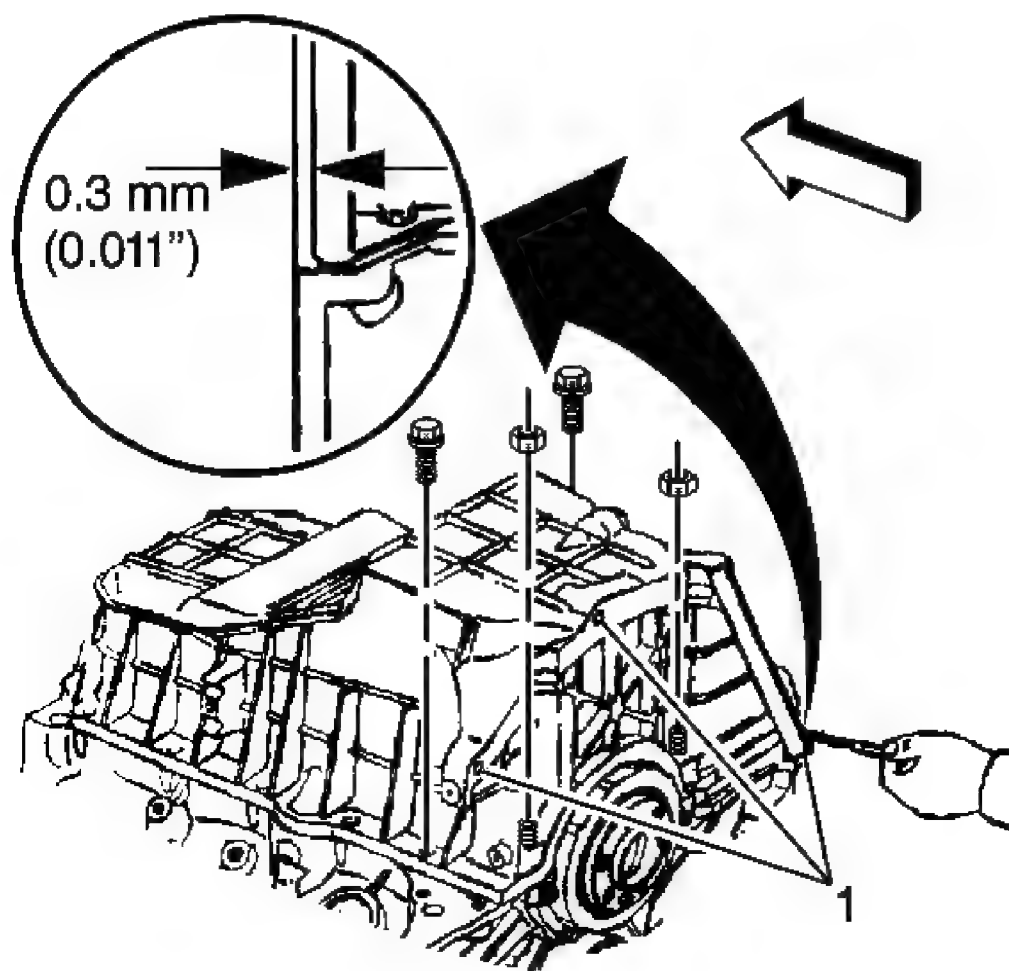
Measuring Pan-To-Transmission Housing Clearance
